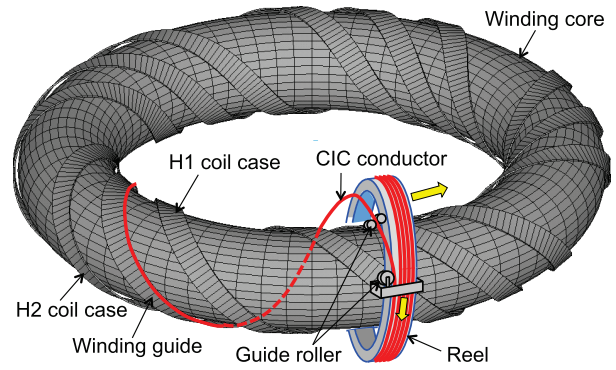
Schematic drawing of winding a CIC conductor into the winding guide.
